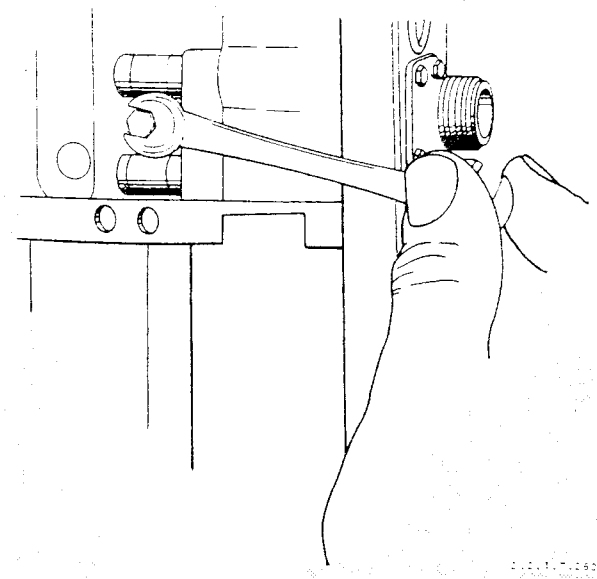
Adjusting Sear-Pin of Gun Charger to Non-Firing Position
